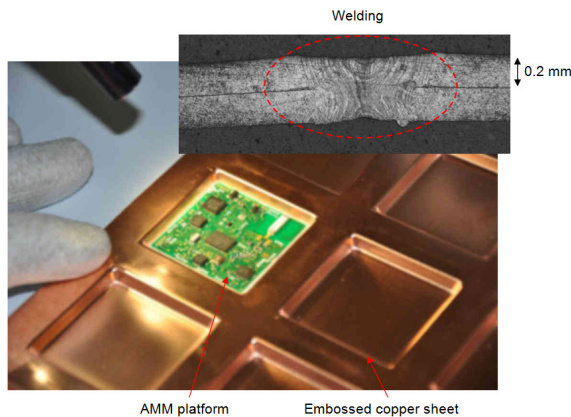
AMM assembly for high temperature applications, micrograph of the welding between two copper sheets for hermetic sealing is in inset.
